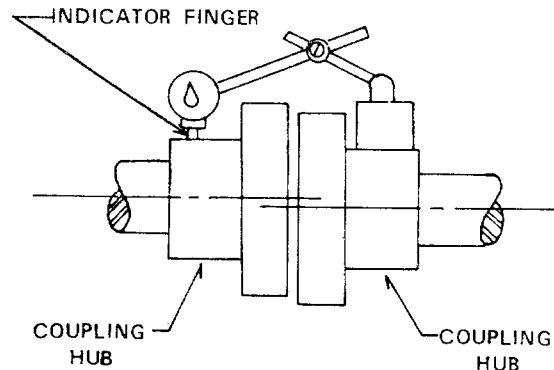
TESTING PARALLEL ALIGNMENT OF MOTOR AND GENERATOR SHAFTS
